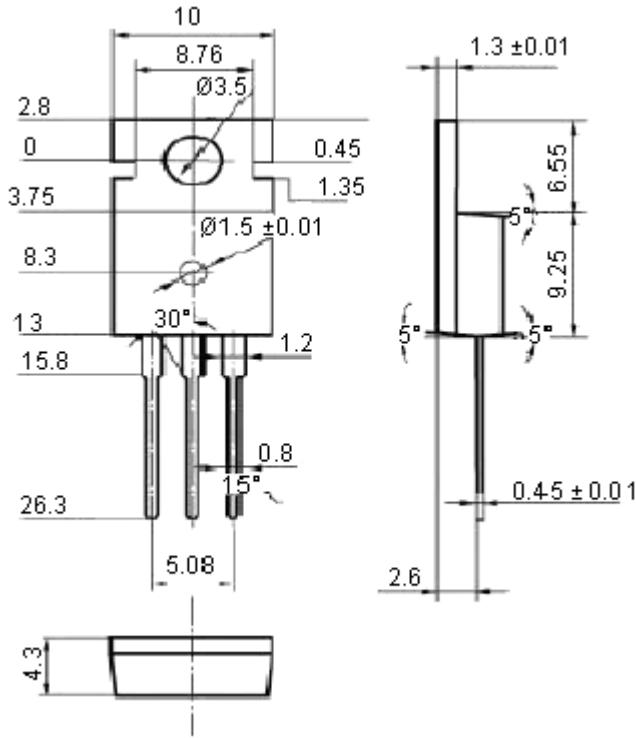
Outline Dimensions (unindicated tolerance : ± 0.1 mm)
